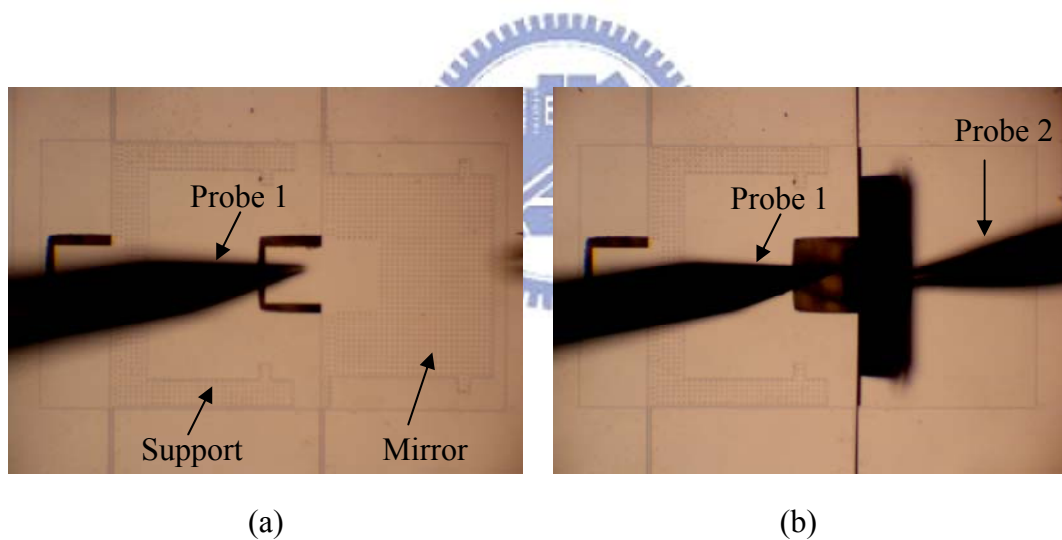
Assembly process of a 135° mirror without hinge, (a) two probes aligned before assembly, (b) mirror plate pushed by Probe 1 and held by Probe 2 from the other side.
